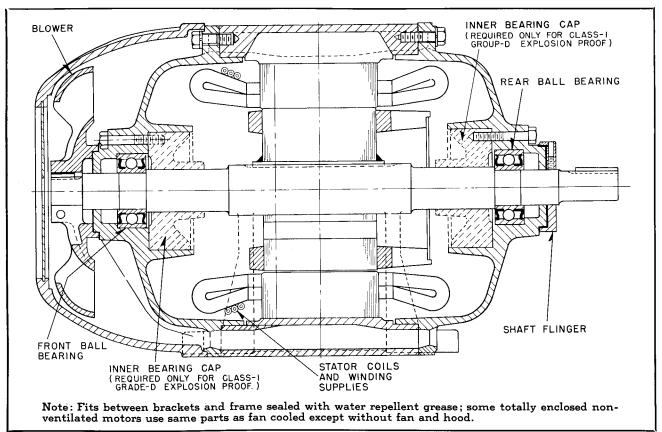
Arrangement of Parts—Fan Cooled and Explosion Proof Assemblies
